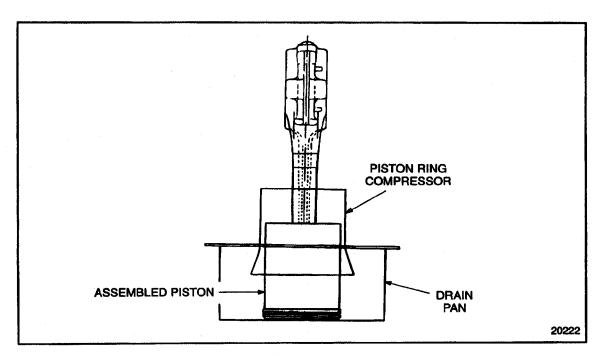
Installing Piston and Connecting Rod Assembly into Ring Compressor
